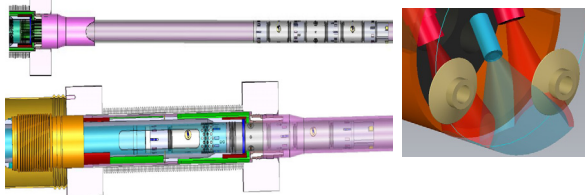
Schematic representation of cutting with rollers in the middle and to end of pressure tube
